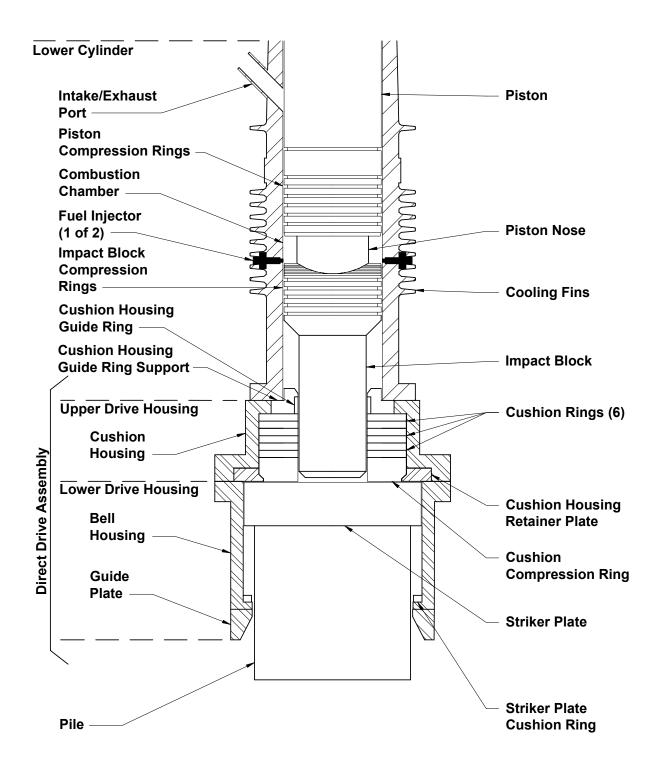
Impact Hammer – Lower Cylinder and Direct Drive Assembly
